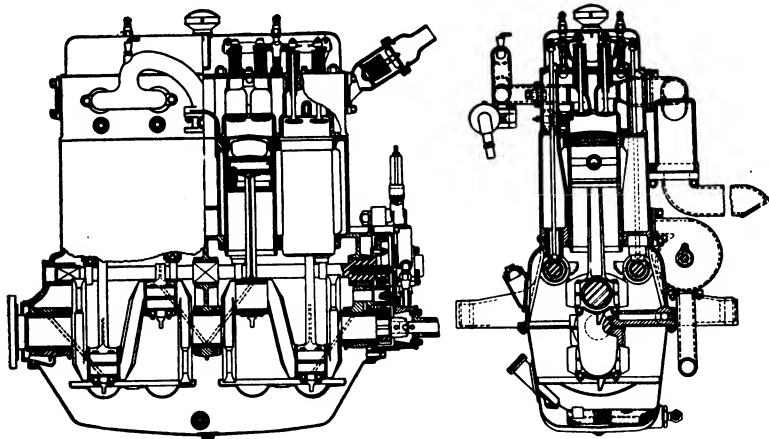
Side and End Sectional Views of Twin City Sixteen-Valve Motor
